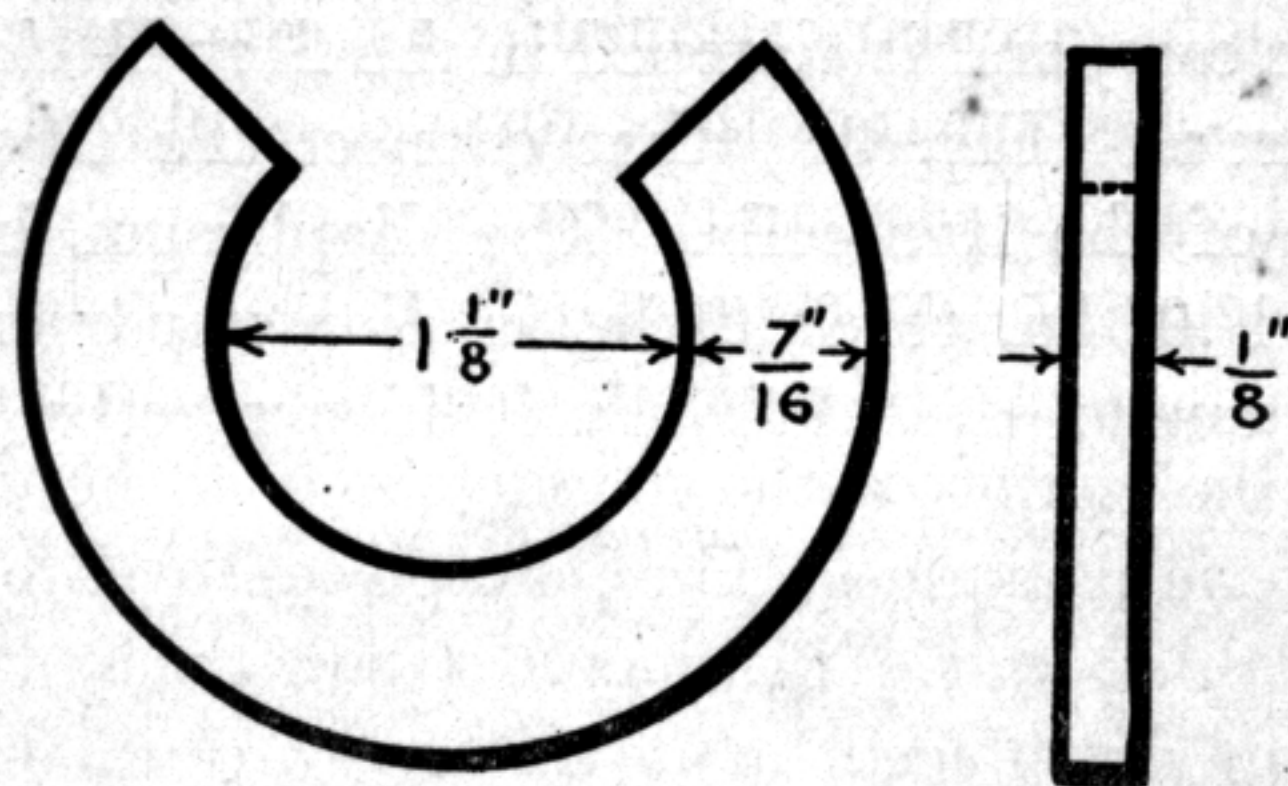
MAGNET OF BELL HEAD RECEIVER.
